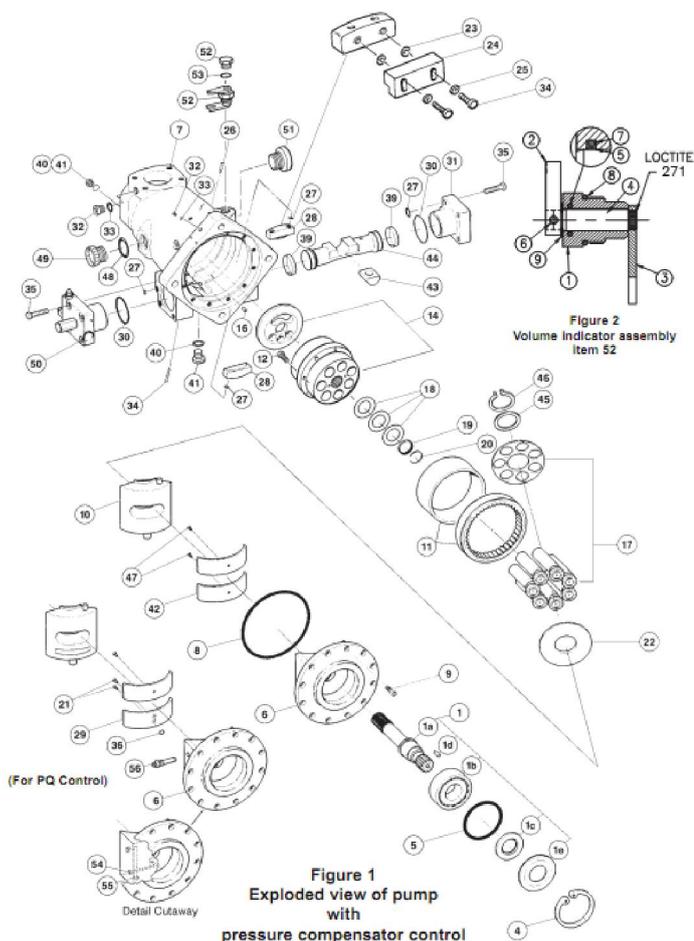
Volume indicator assembly	Рисунок 2 Индикатор объема в сборе
